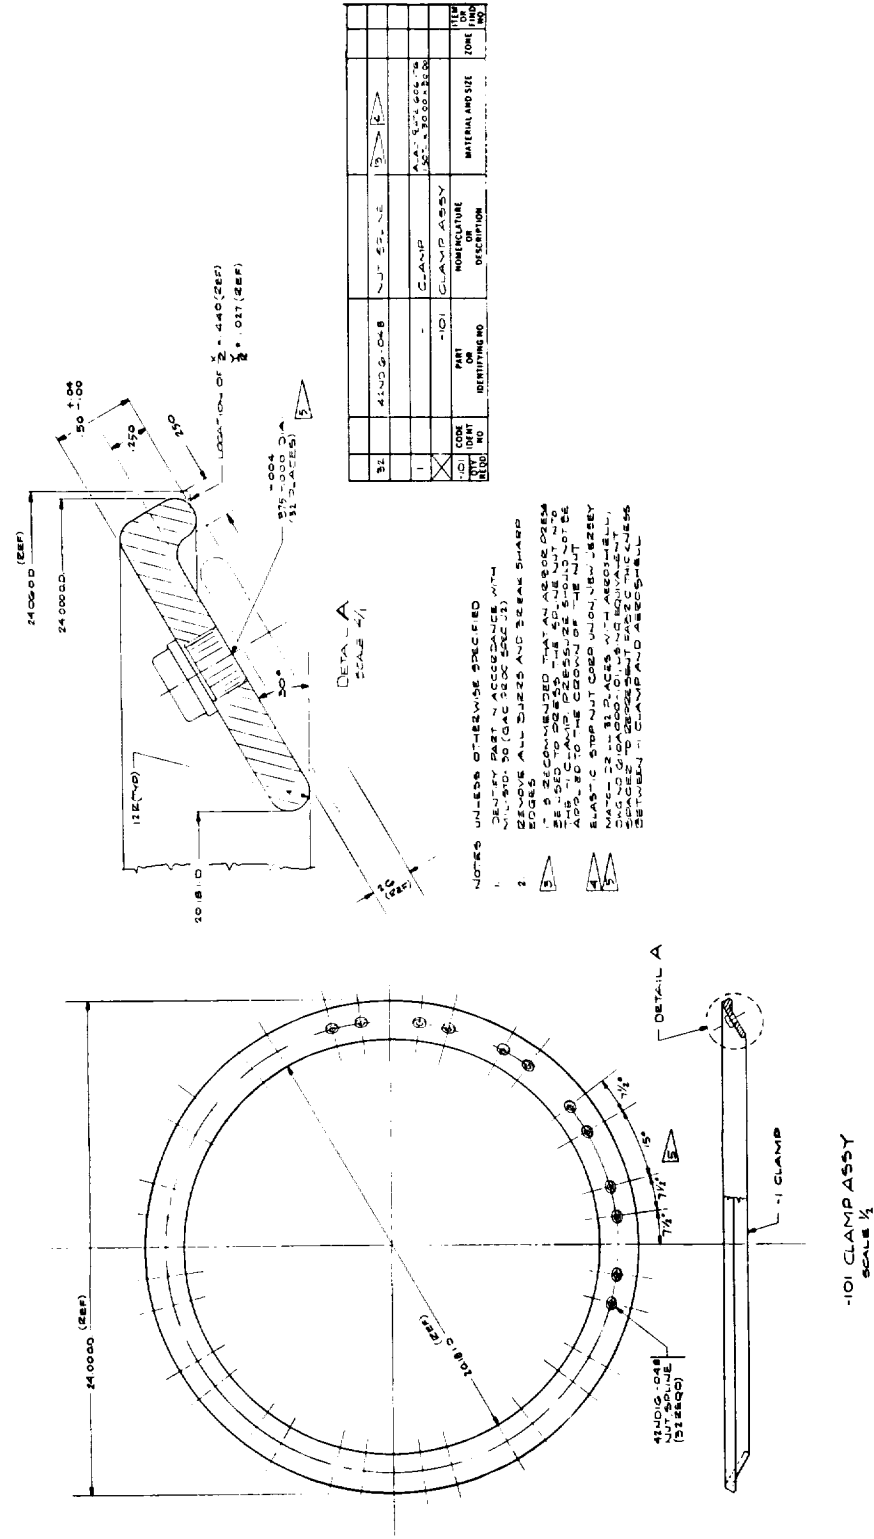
Clamp Assembly (Drawing 610A000-104)
